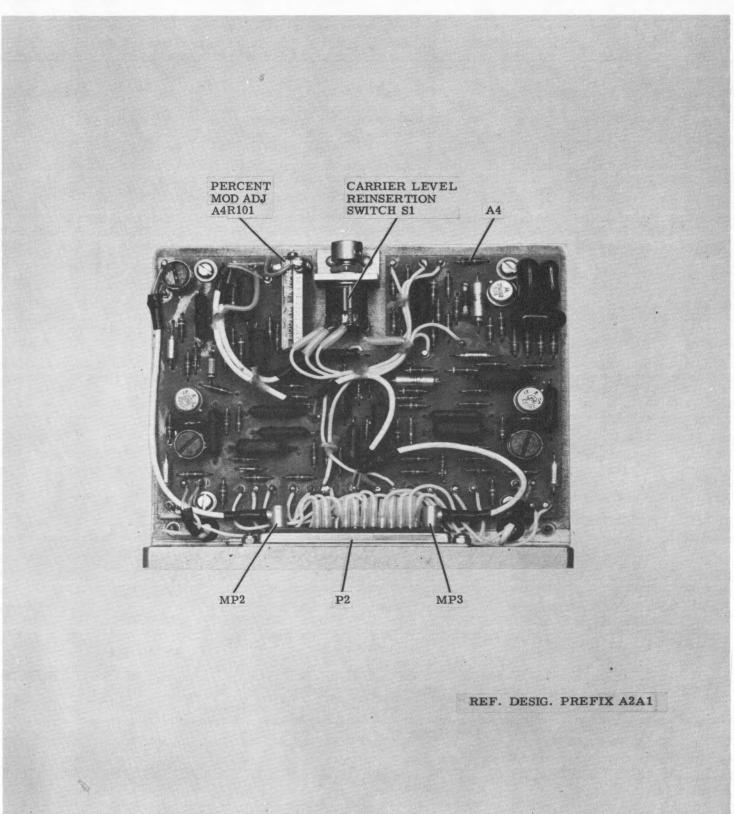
Mode Selector Electronic Assembly, Left Side, Component Location
